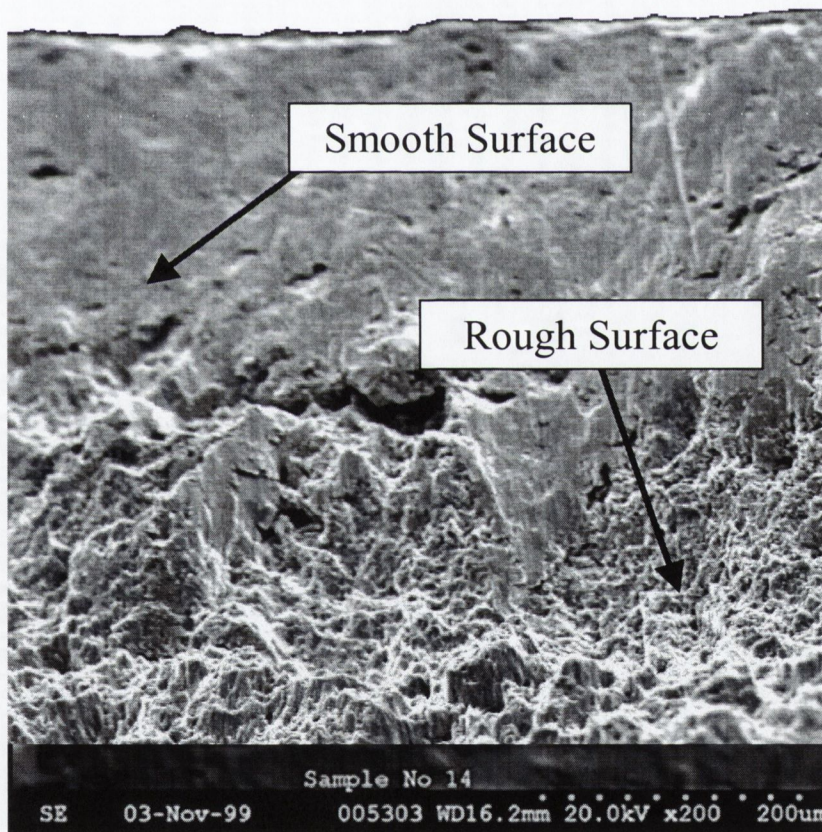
Fractured Surface Showing Signs Of Fatigue And Rapid Fracture
